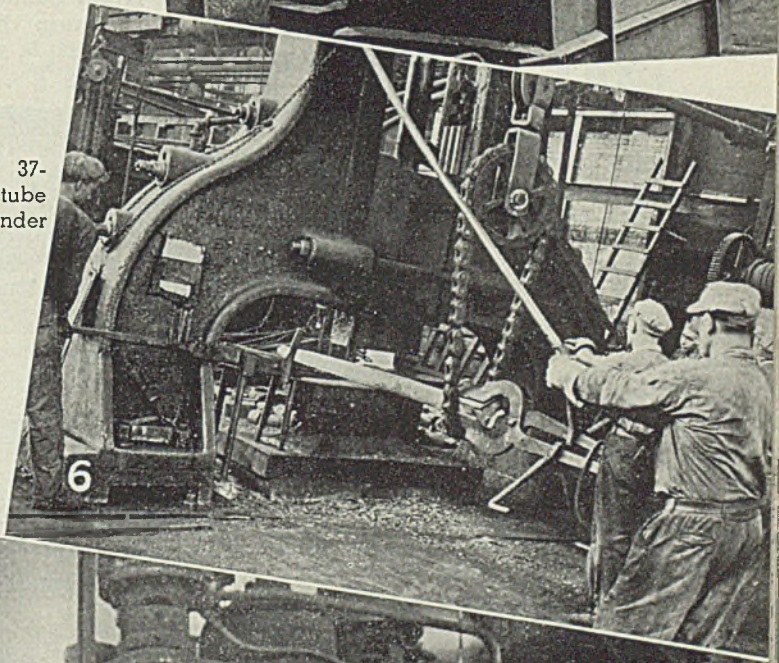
Here a 37-millimeter gun tube is being forged under a hammer
